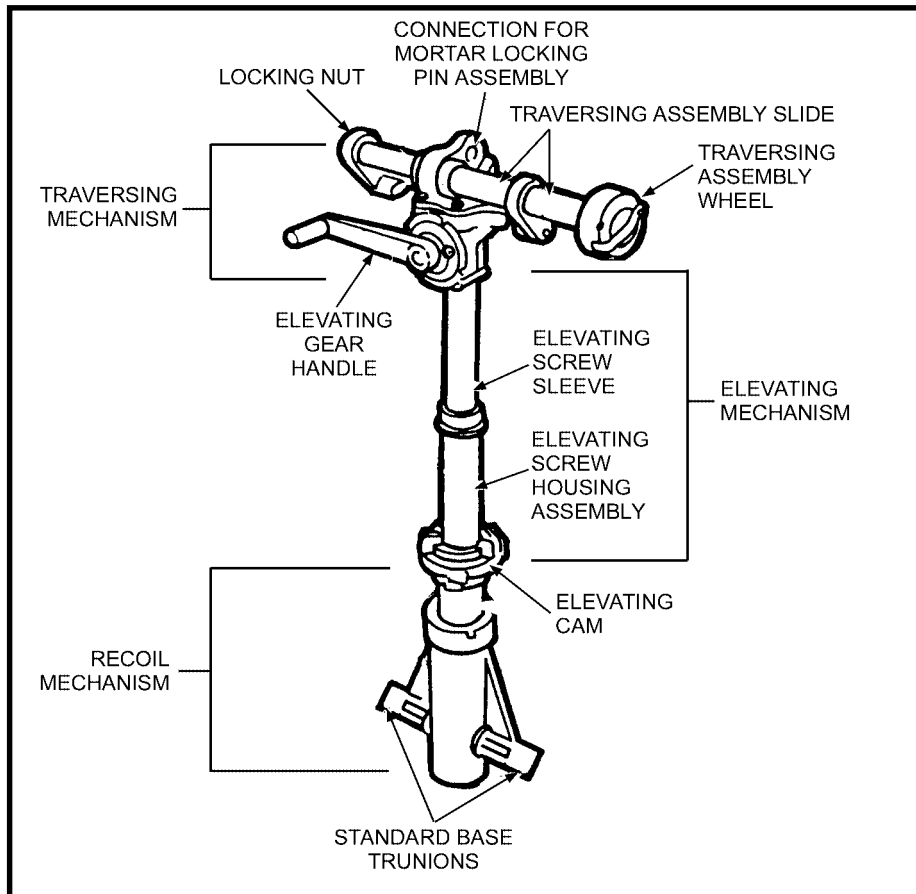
Standard assembly with elevating, traversing, and recoil mechanisms.
